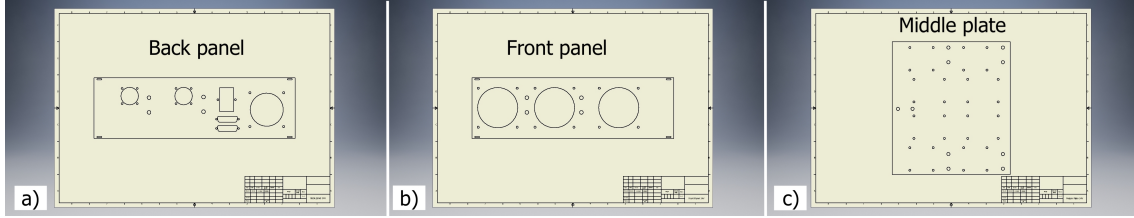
Schematic drawing of the middle plate, back and front panel showed in fig. 4 a).
